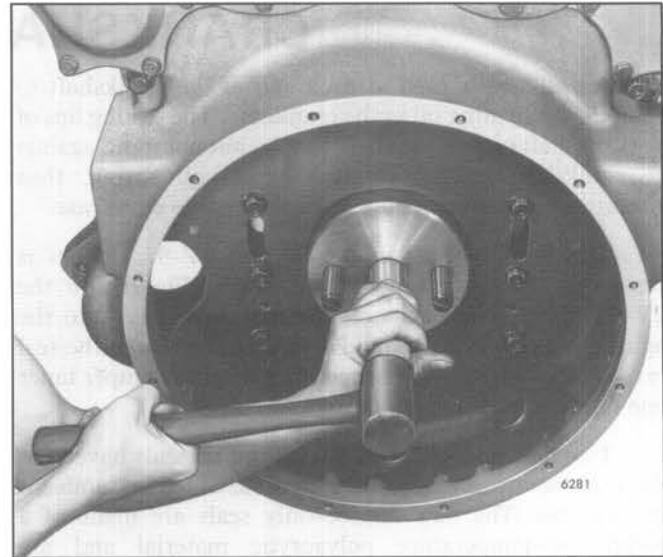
Installing Crankshaft Rear Seal with Installer Set J 21112-B and Handle J 3154-1
